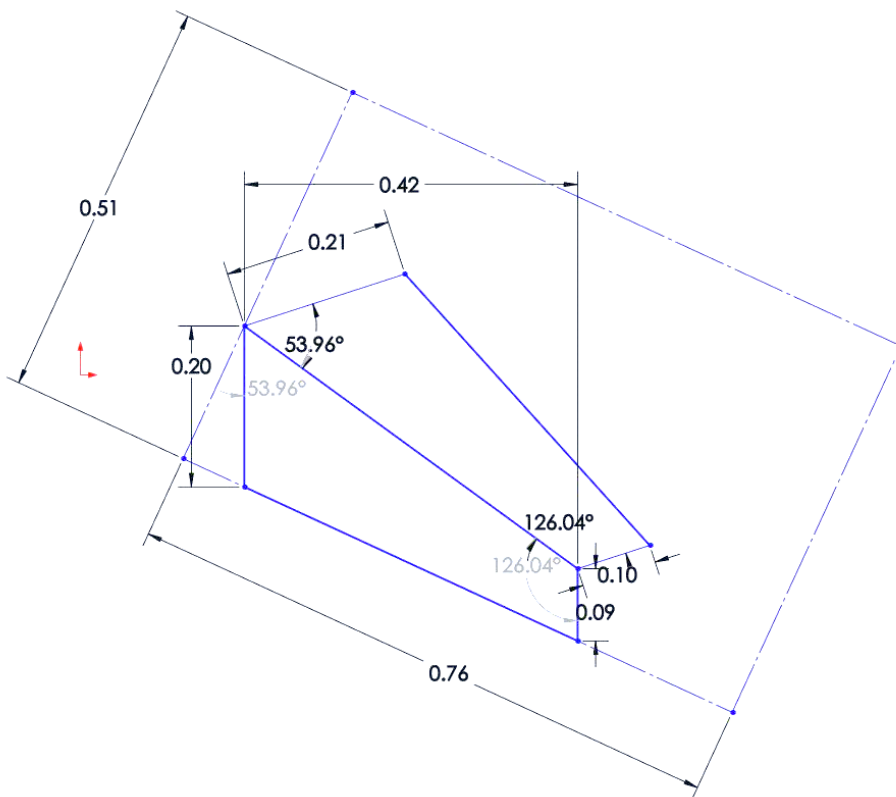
CAD sketch of outboard panel template, dimensions in meters
